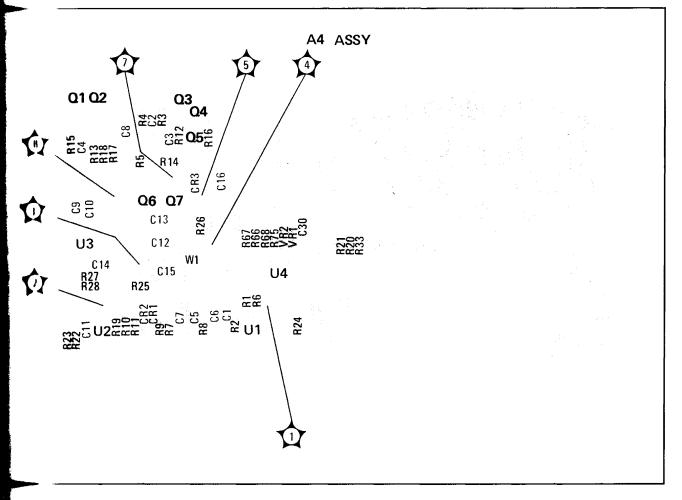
P/O A4 Assembly (DC Ampl/Sync Detector) Component and Test Point Locations
